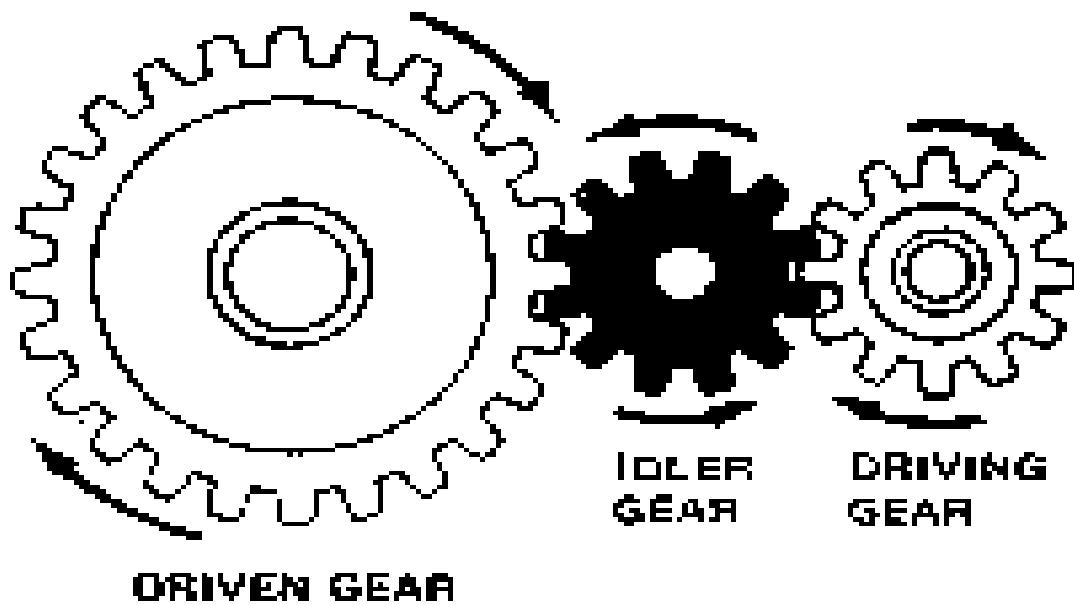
The Idler Gear Causes the Driven Gear to Turn in the Same Direction as the Driving Gear.
